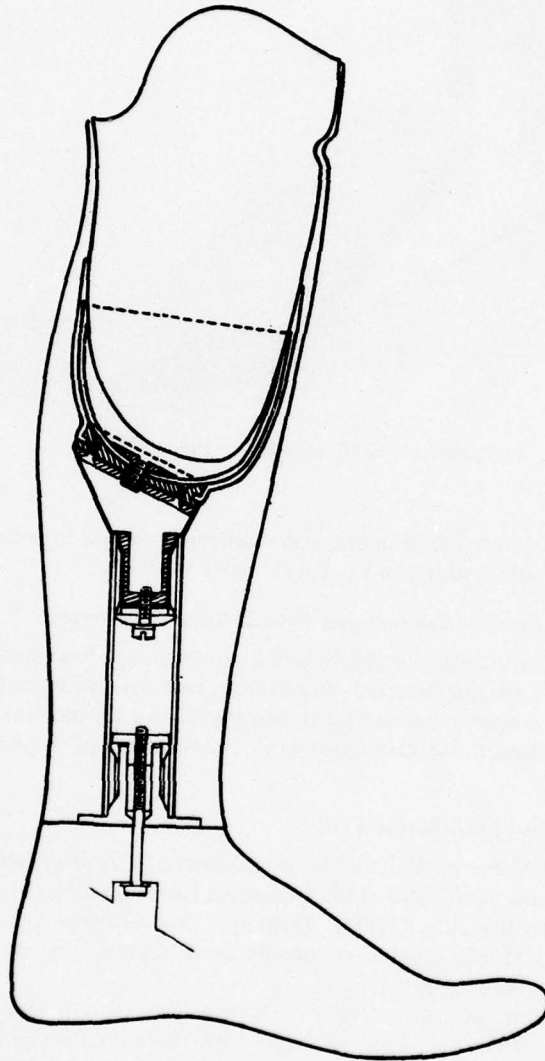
The UC-BL modular pylon system for below-knee prosthesis, using the internal expanding tube coupling and spherical alignment coupling.
